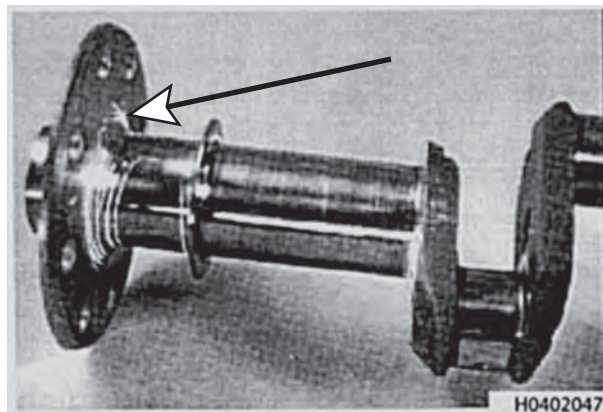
Fluorescent Magnetic Particle Indications of Cracks in Crankshaft of Small Aircraft Engine Damaged in Plane Accident
